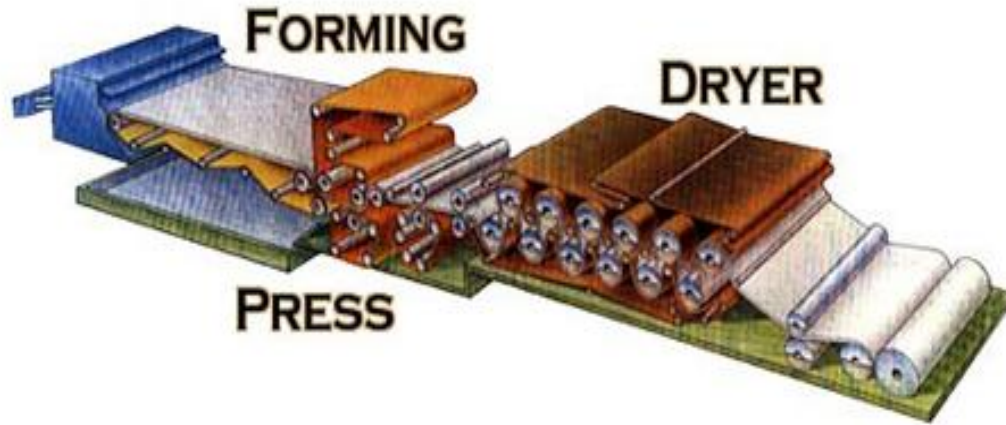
Example of a Fourdrinier paper machine. (www.tappi.com)
